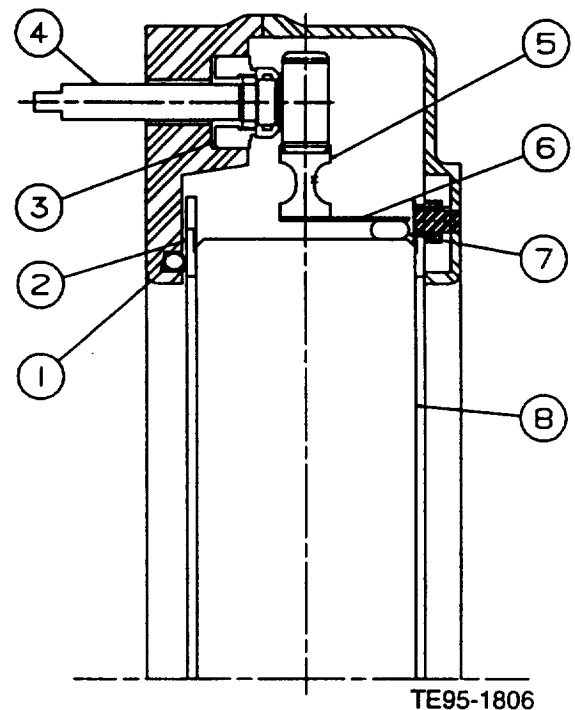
One potential regenerator system incorporates L-seals and a mechanical pinion and ring gear drive system.
